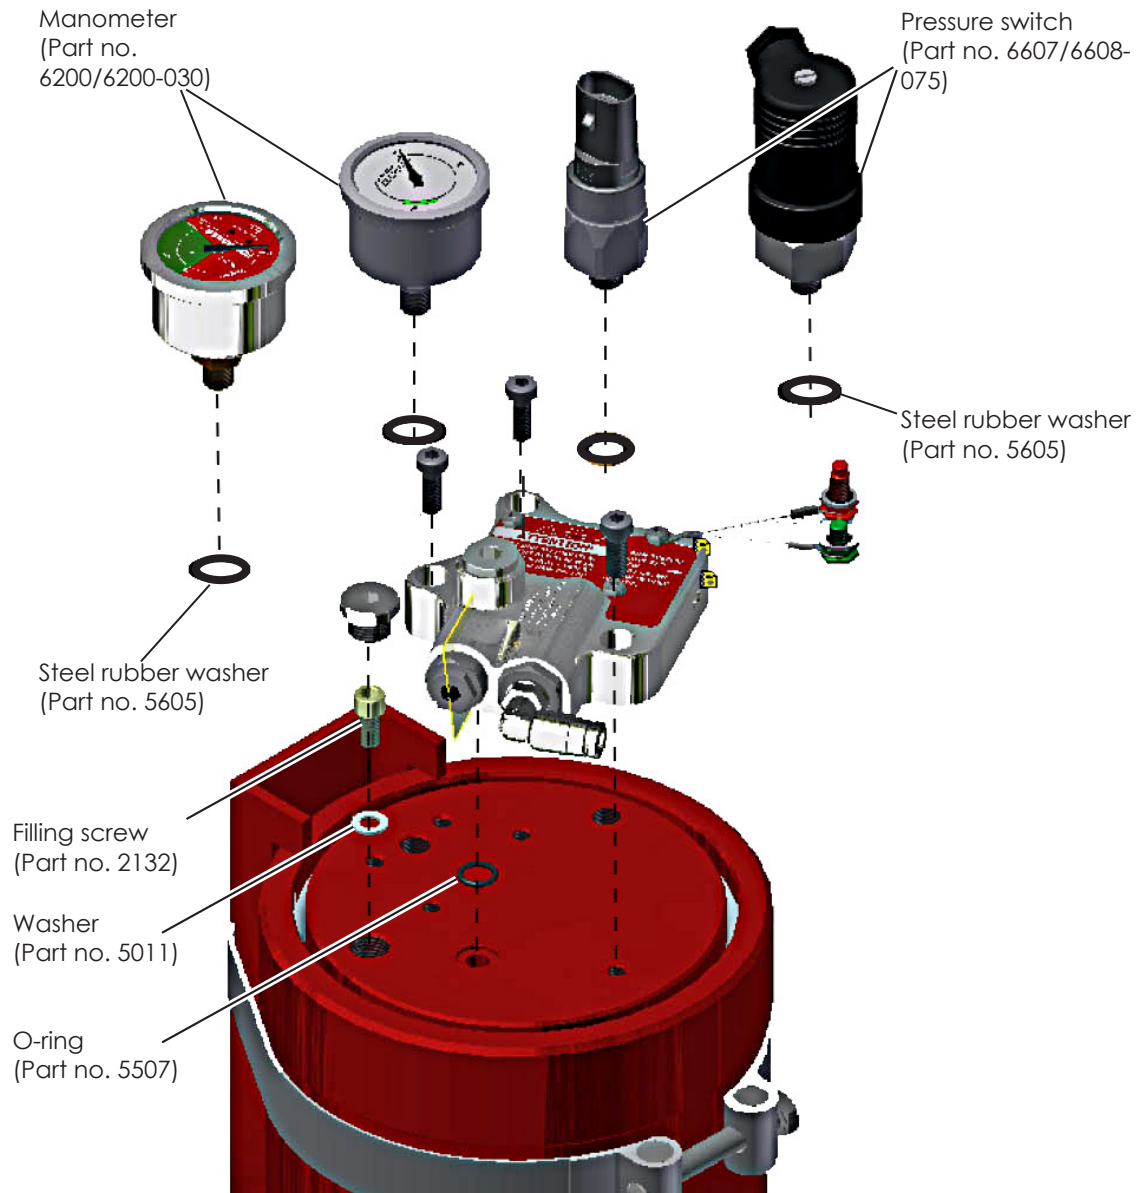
Exploded view electrically activated valve (Part no. 6091-010)
